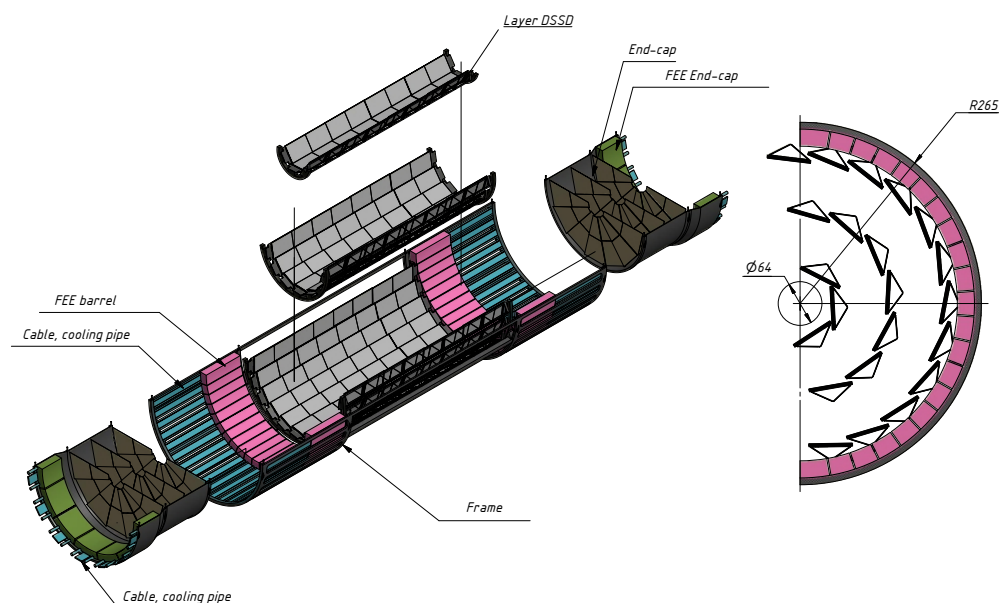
Sketch of the assembly of the end-cap and the barrel parts of VD.
